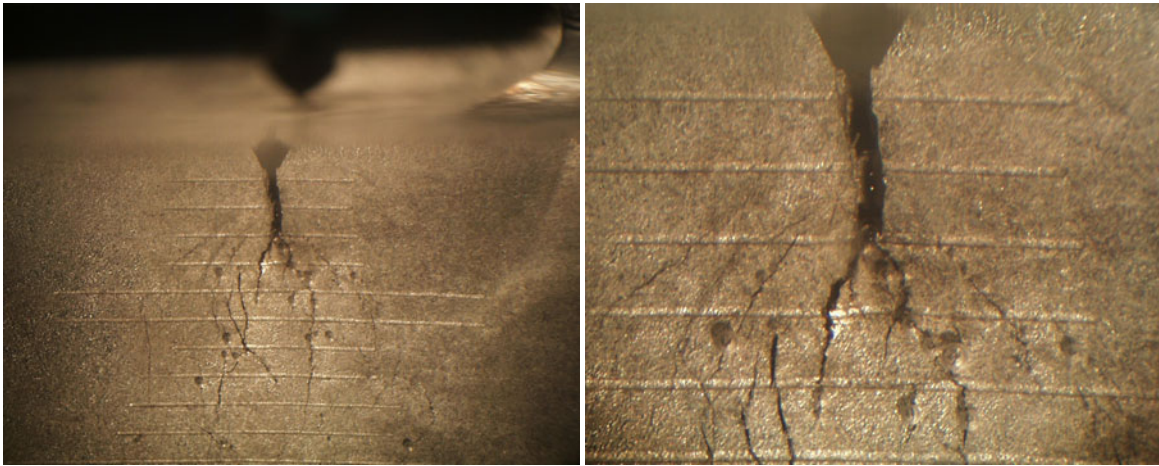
Secondary crack branching for AZ91 CT specimen tested in distilled water.
